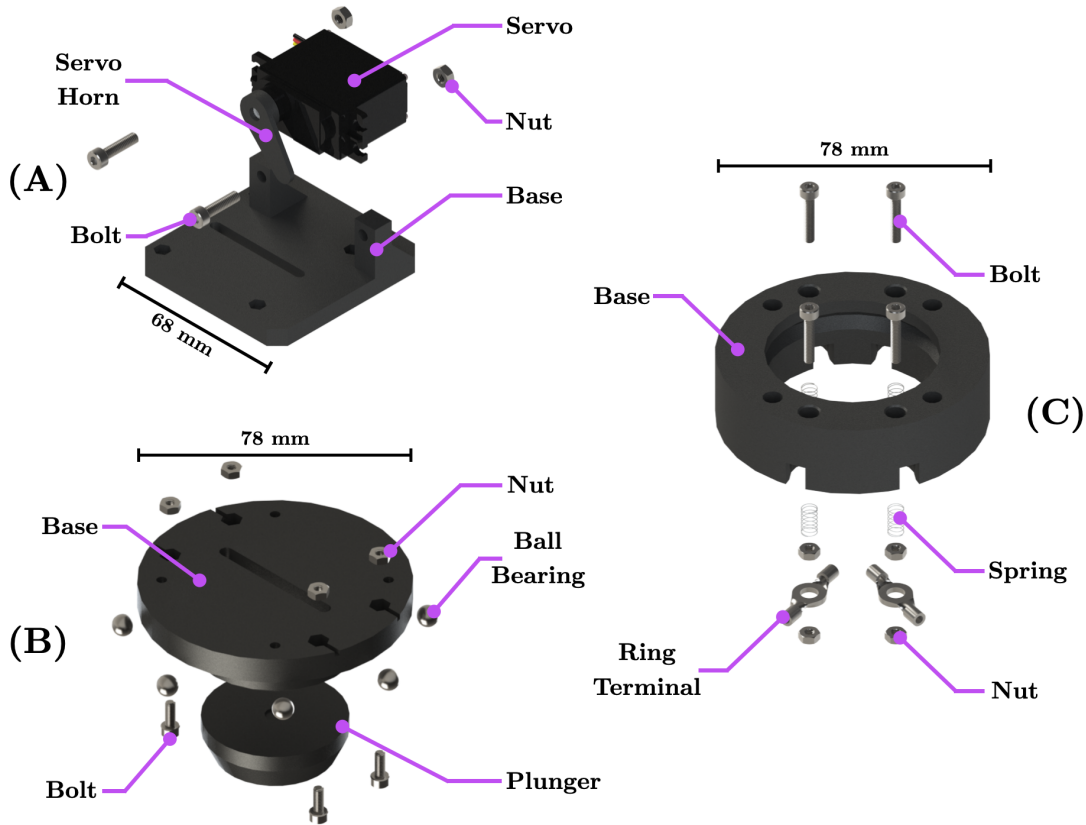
Quick Connect Sub Assemblies Exploded: (A) Actuator, (B) Male Quick Connect, and (C) Female Quick Connect
